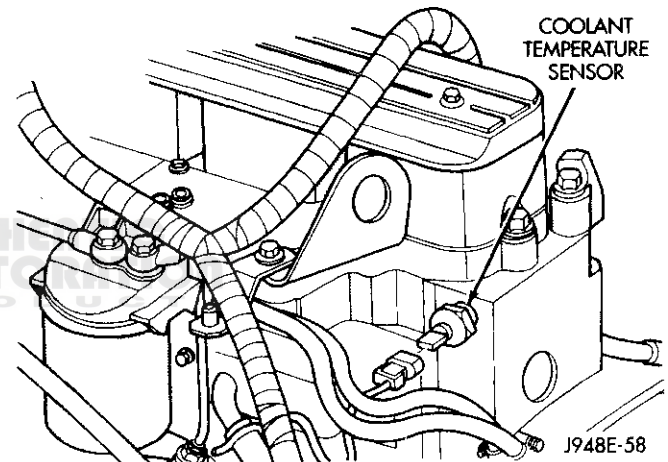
Coolant Temperature Sending Unit - Diesel Engine
